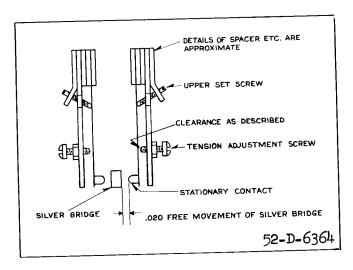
Front View of the Directional Unit Showing Contact Adjustment Details.
